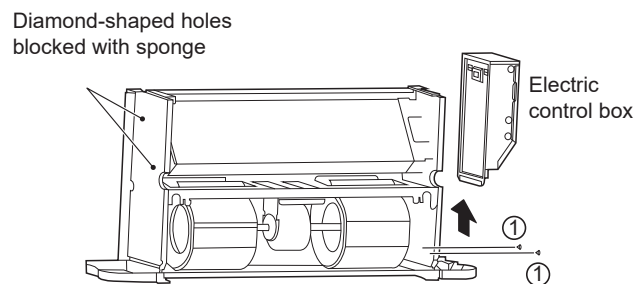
Removing the electric control box and blocking the diamond-shaped holes
